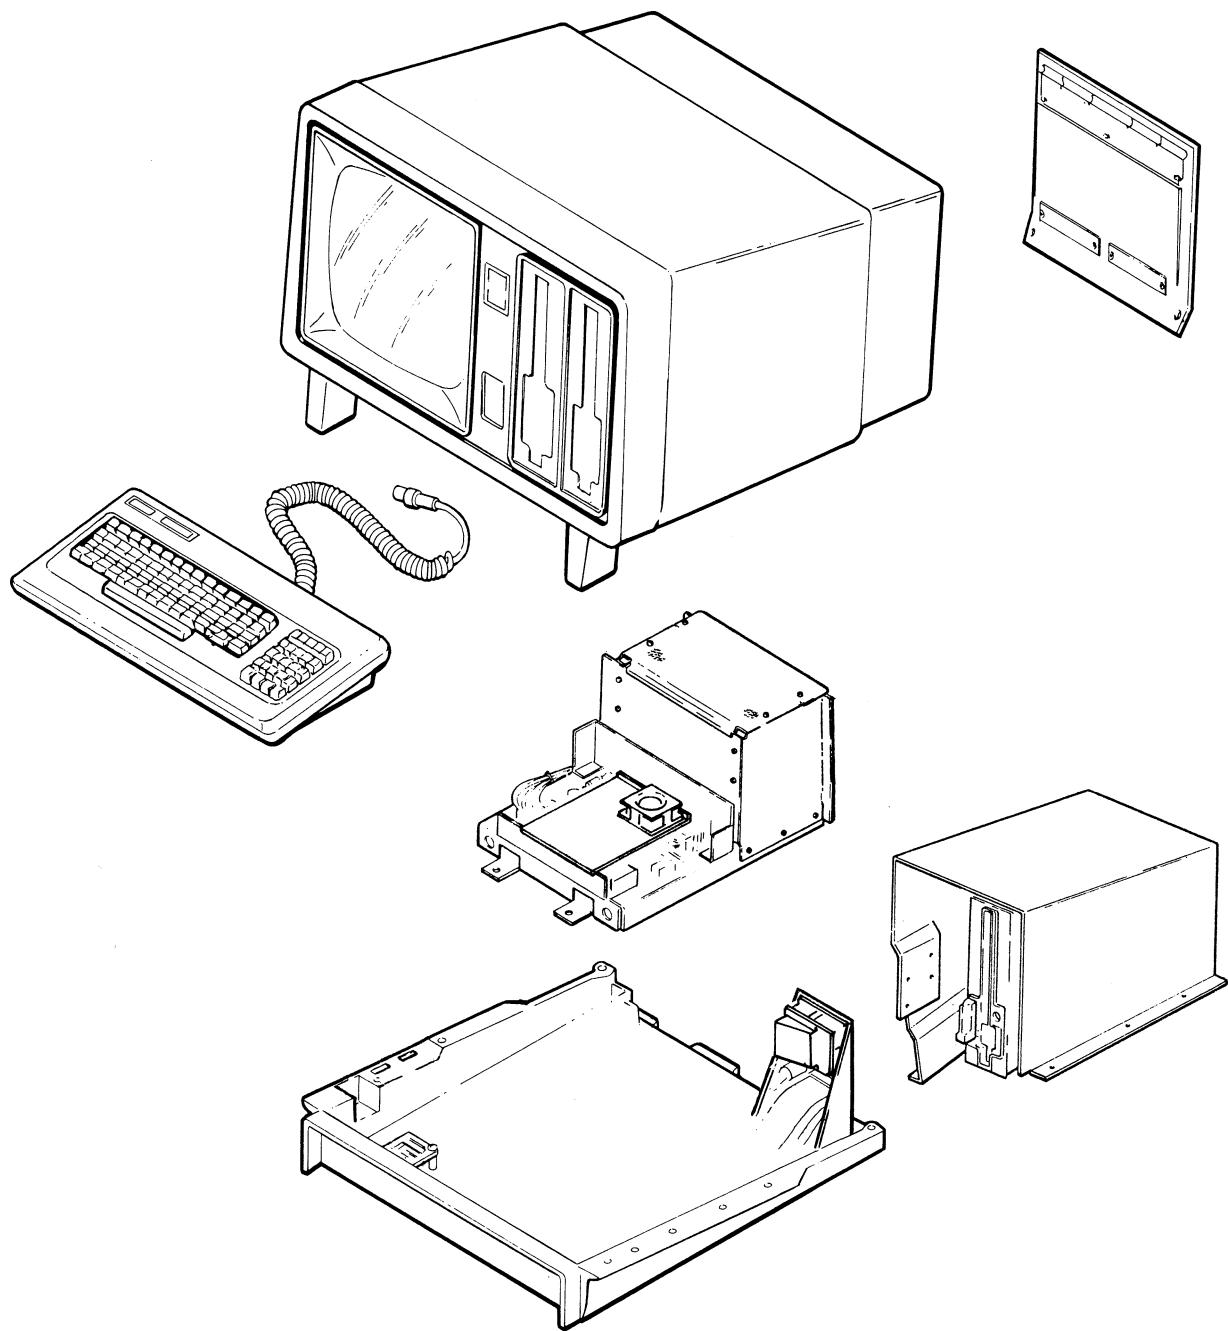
Major Assemblies, TANDY 6000/6000-HD
